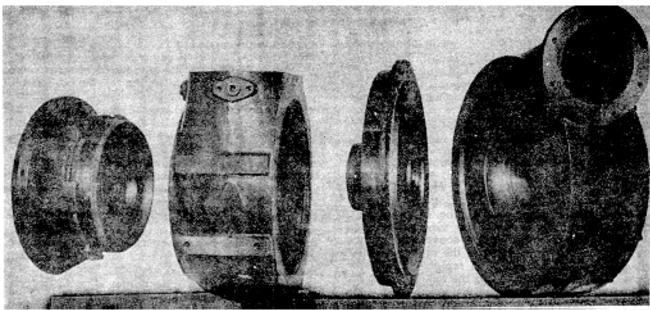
Left to right: Inlet Casing Assembly, Turbine Casing, Intermediate Casing, Blower Casing Assembly.
